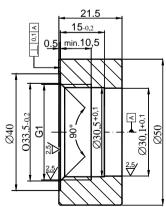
Weldable fitting ring for use with transmitters with CG1 - type connector Material – 316Lss
